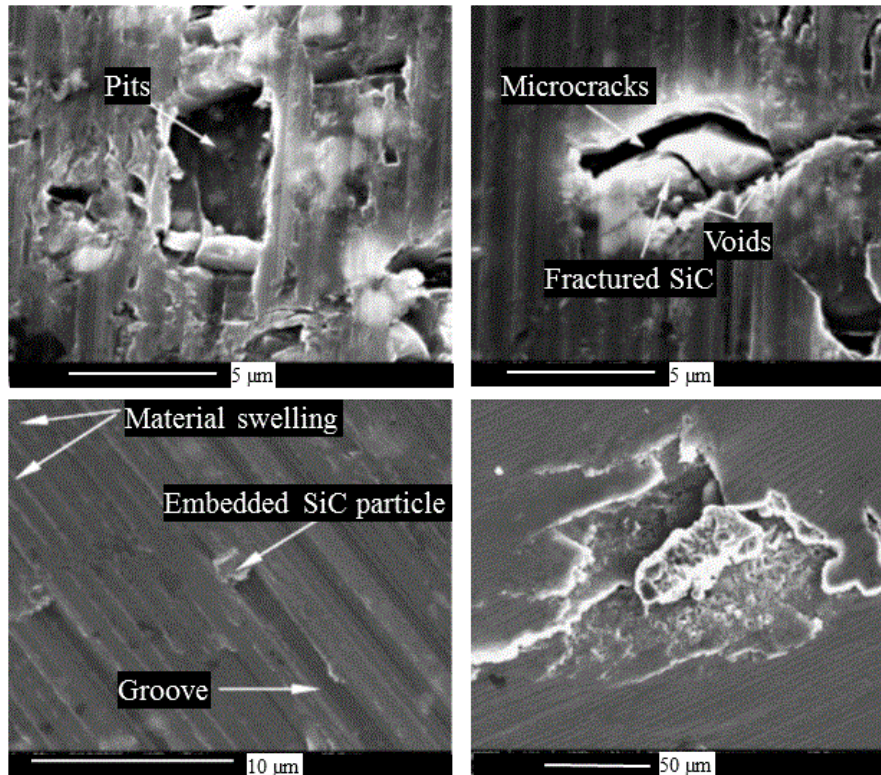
Machined surface of MMC material shows pits, microcracks, voids, fractured particles and material swelling, embedded reinforced particle and soft matrix covering the pits.
